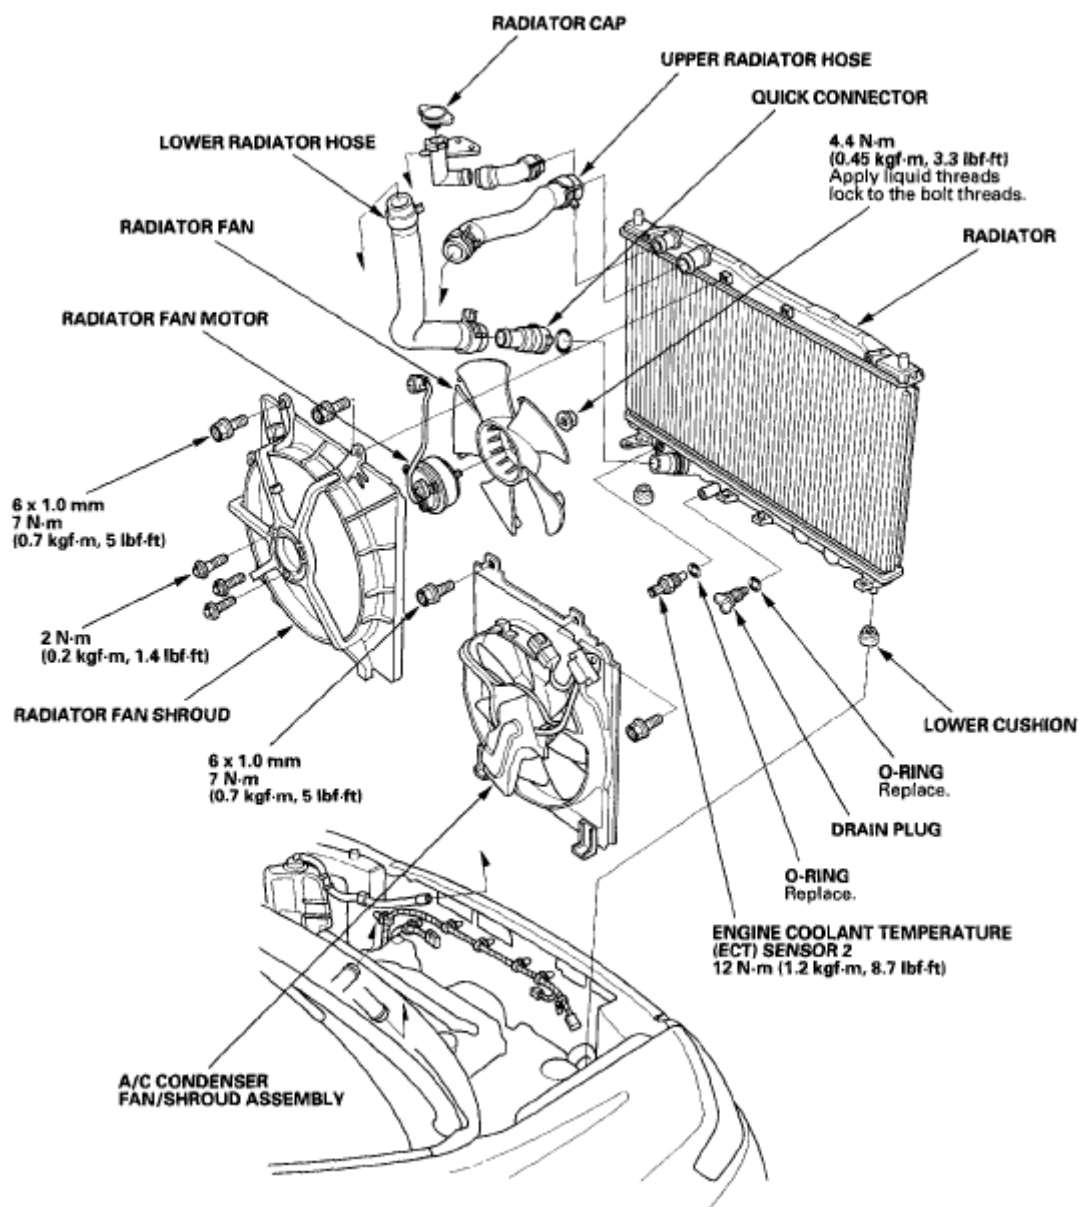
Identifying Radiator And Fan Components - COPAR - With Tightening Torque
